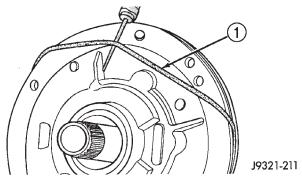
Removing Pump Seal Ring 1 – PUMP HOUSING SEAL RING
